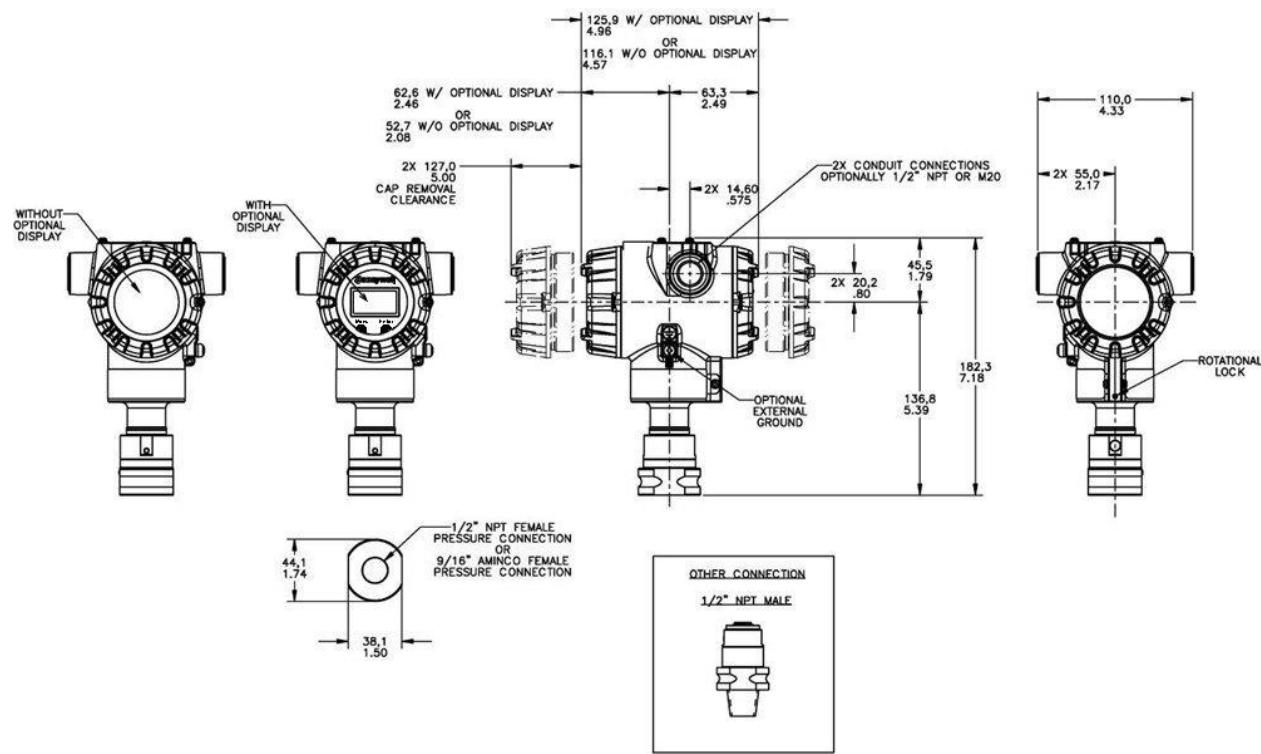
Typical mounting dimensions of STG74S, STG77S, STG78S, & STG79S for reference
